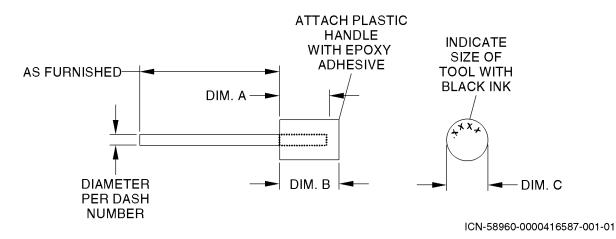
Crimping Tool Gage Set, T3008994-VAR
